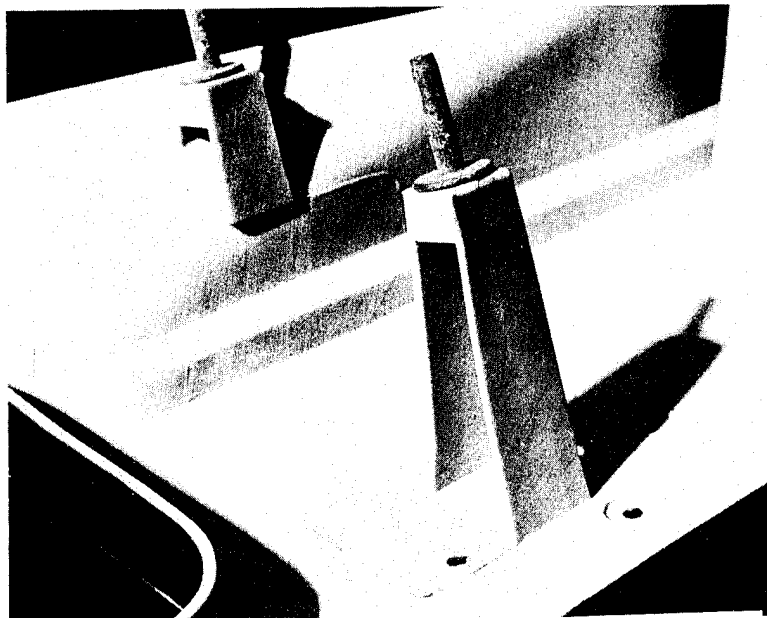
Coring on the 1974 Chevrolet Chevelle-Laguna rear panel to eliminate sinks opposite bosses.
